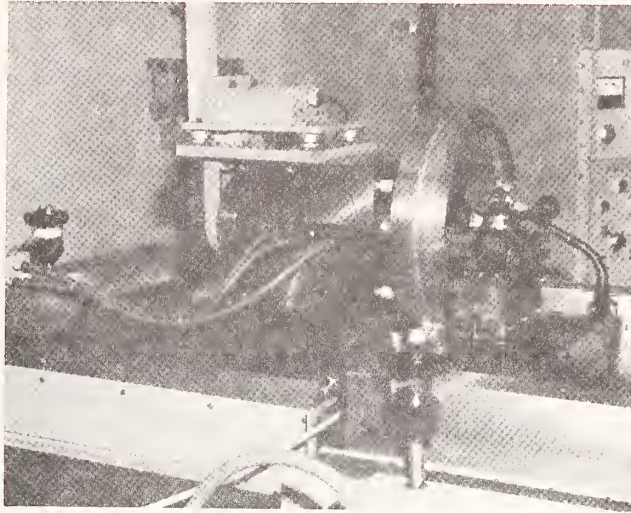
This photograph of the NWC machine shows the tool and spindle slides, the tool post assembly including precision height adjuster, chip/coolant guard, and spindle housing. A 6-inch-diameter copper flat is being machined.
